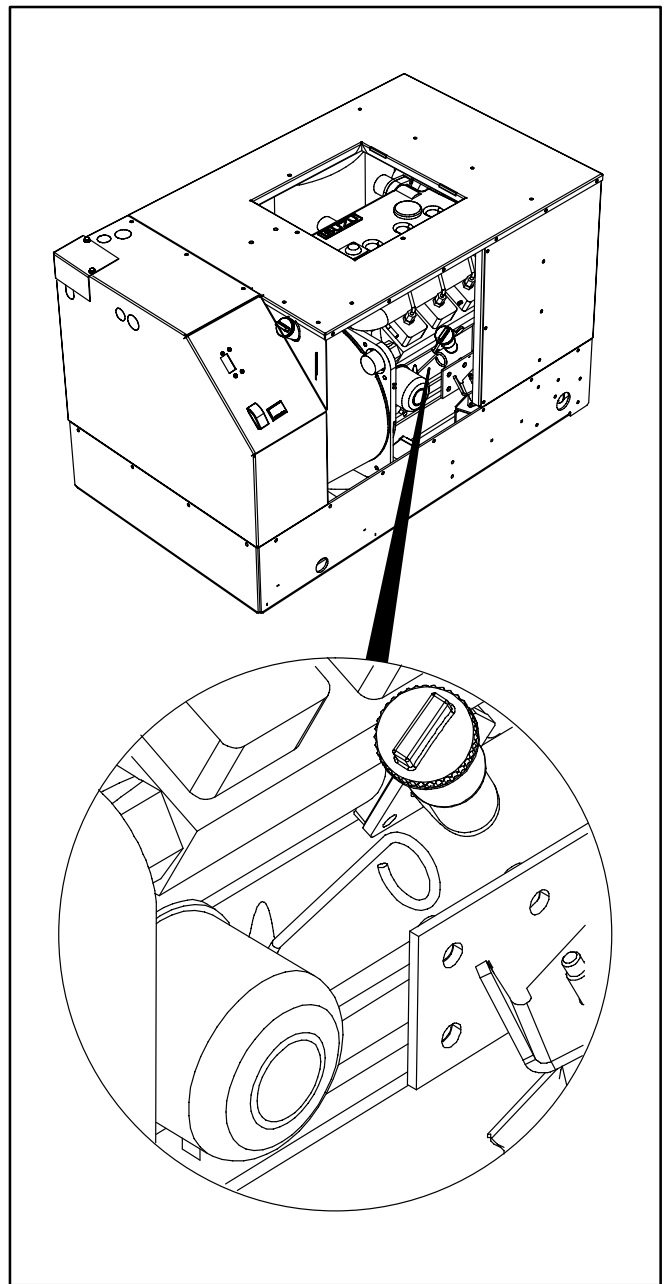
CHECKING ENGINE OIL LEVEL
